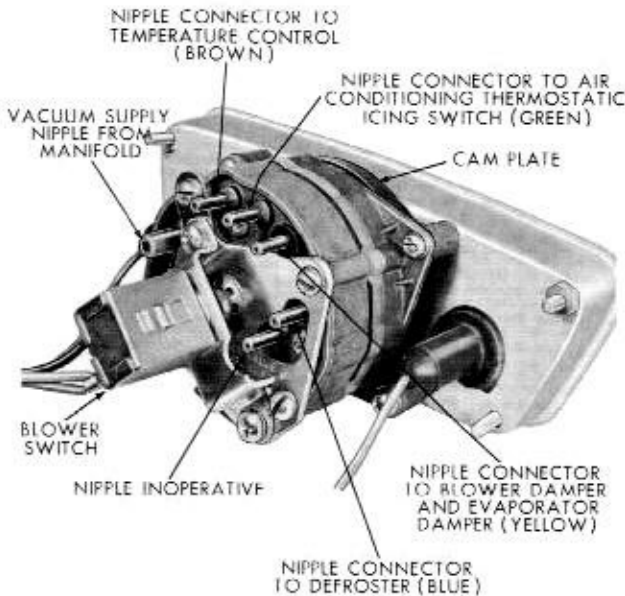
Vacuum Servo Control—1958—(8M-7910)
